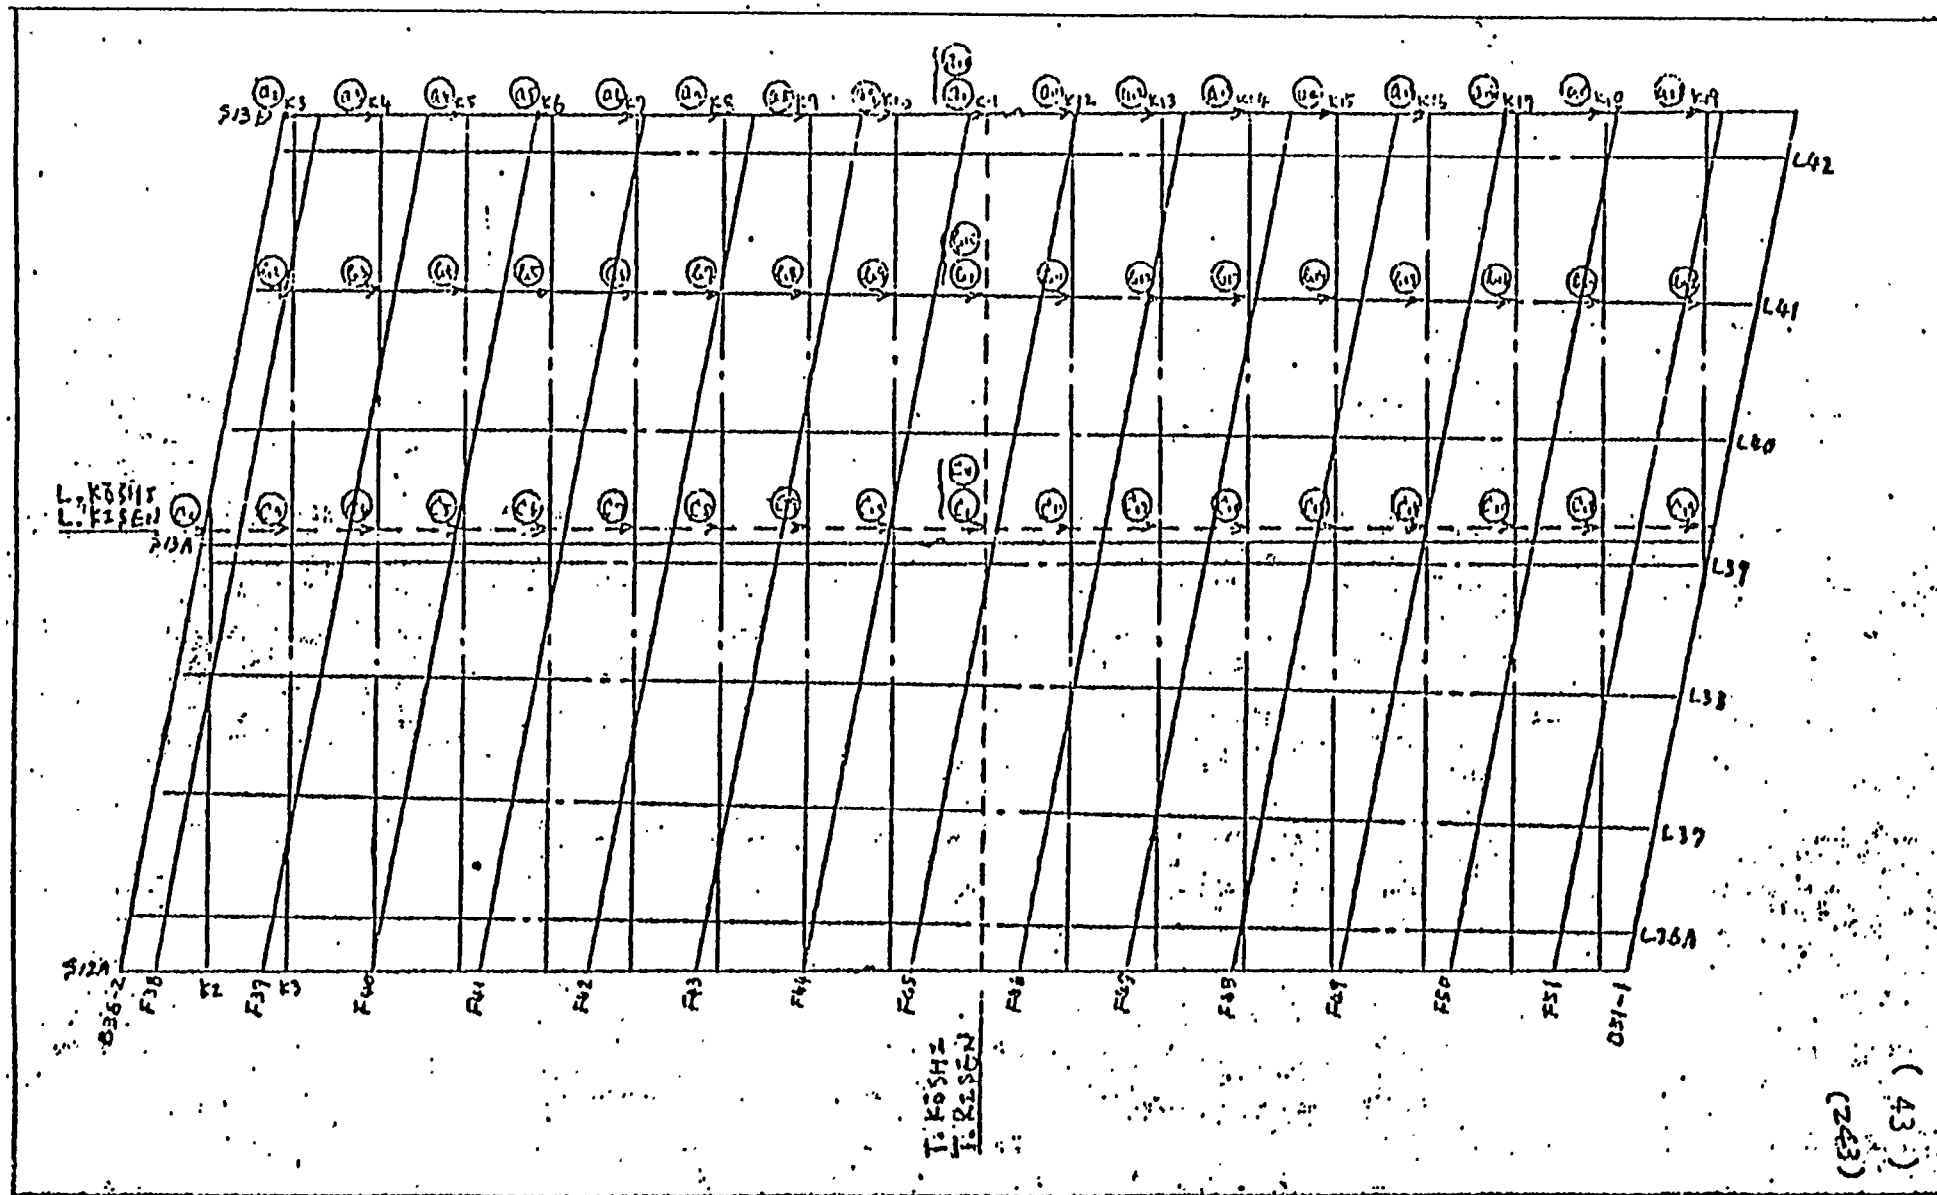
CHECK DATA FOR AUTOMATIC WELDING
